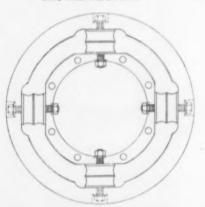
A tuned inertia type torsional vibration absorber for mounting on propeller shafts
